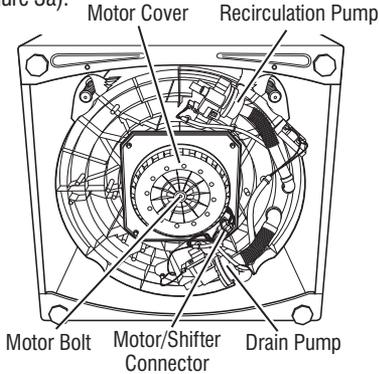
Drive Area, Viewed From Bottom, Sound Pad (If Equipped) Removed
